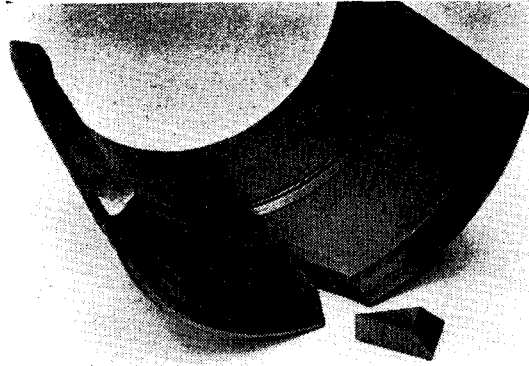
A PRECISION TYPE PLAIN BEARING OR SLEEVE ENGINE BEARING WITH CROSS-SECTIONAL SAMPLE REMOVED IN PREPARATION FOR ROUGH GRINDING, MOUNTING, POLISHING, ETCHING AND MICROSCOPIC EXAMINATION
